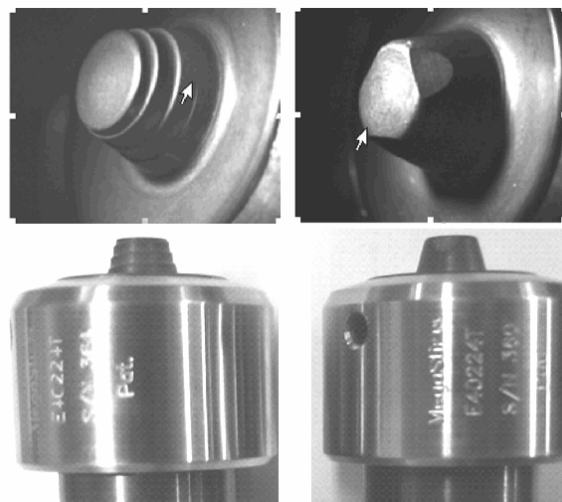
Stepped Spiral tools and Three Flat tools were fabricated in W-25%Re, and Stepped Spiral tools were fabricated in PCBN for use in the program.
